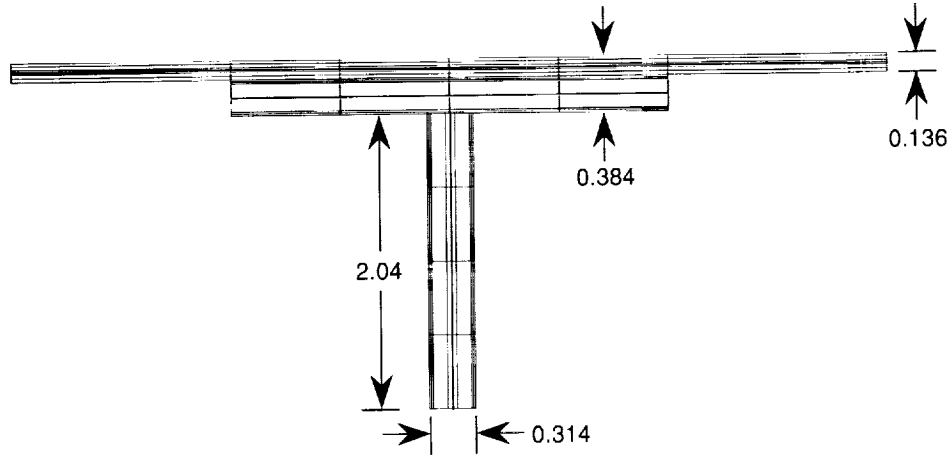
Final design for heavily loaded panel. One repeating element is shown. Dimensions are in inches.
